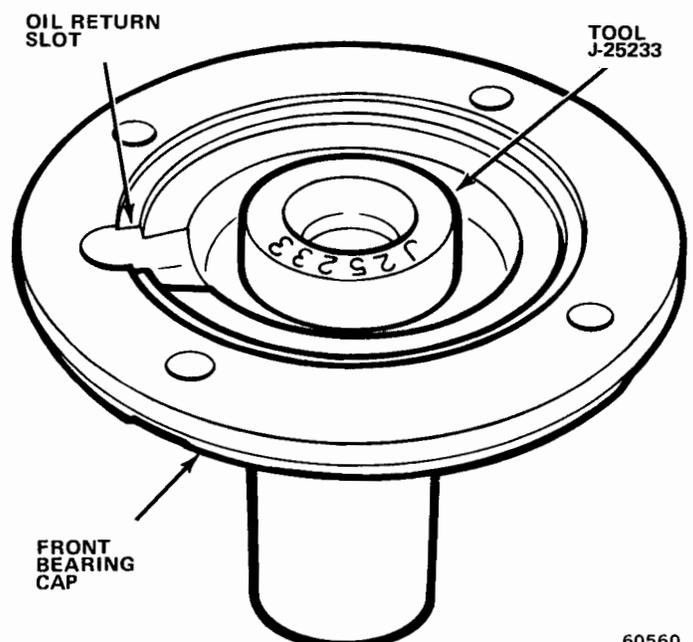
Front Bearing Cap Oil Seal Installation
